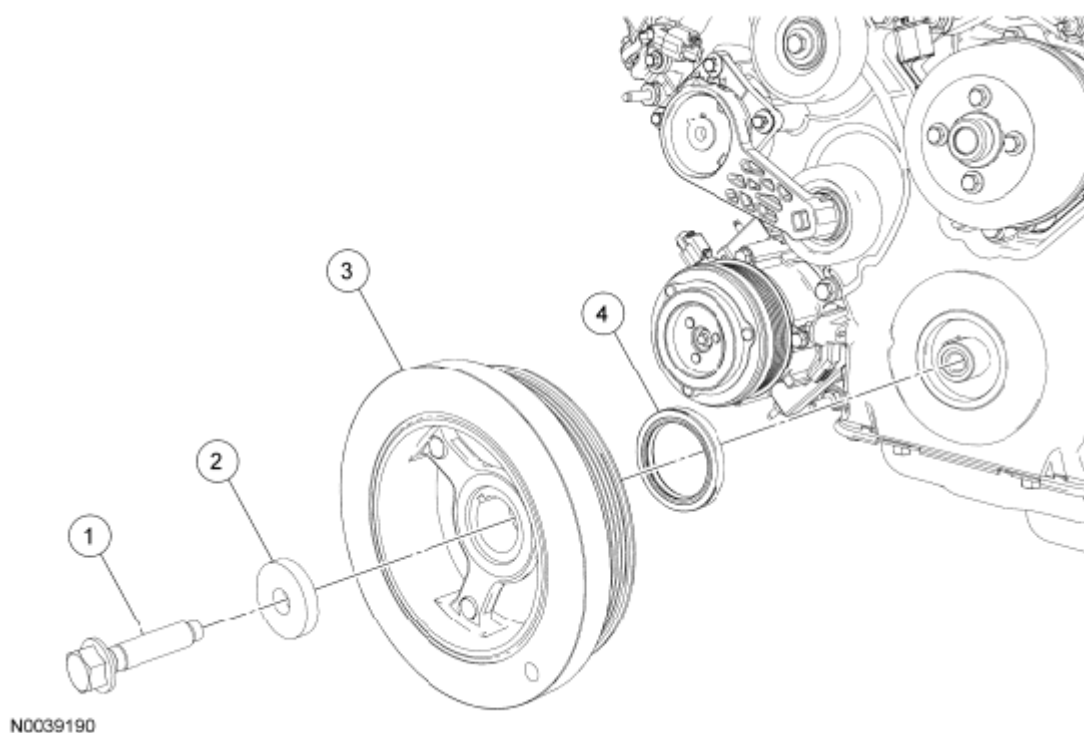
Exploded View Of Crankshaft Pulley And Crankshaft Front Seal - Lower End
